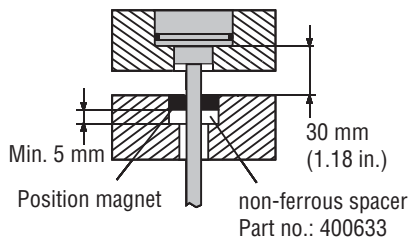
Model MT installation in magnetic material using magnet spacer, part number 400633
